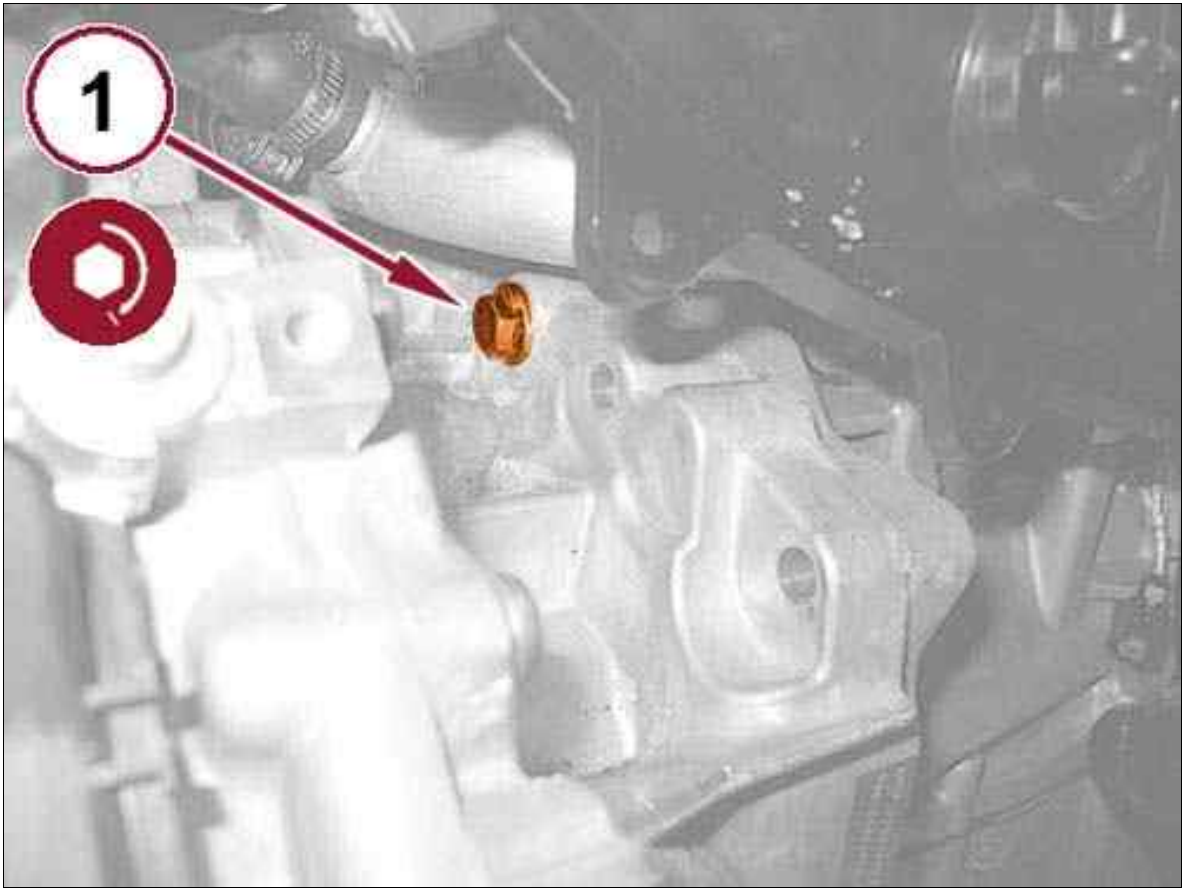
Exhaust Side Upper Transmission To Engine Block Bolt
